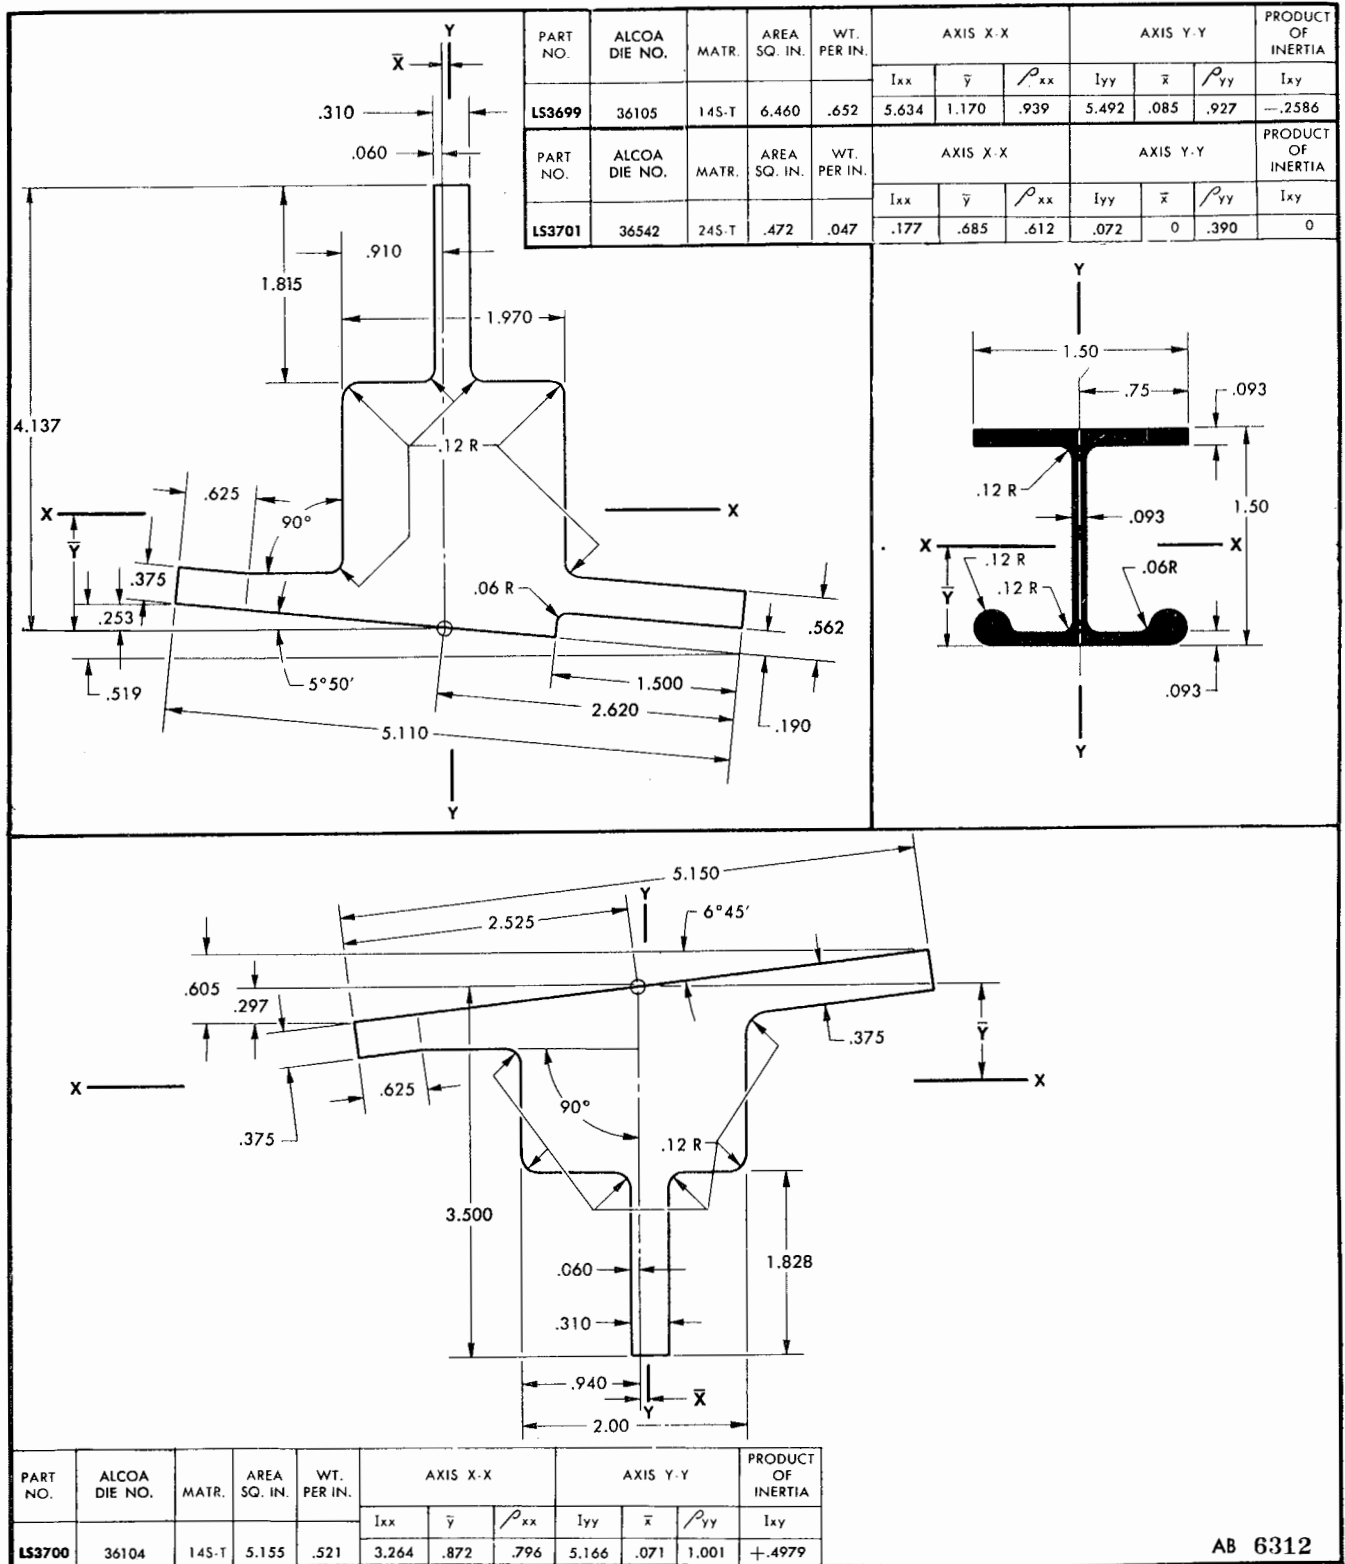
(Sheet 11 of 17 Sheets) — Extruded Standards
